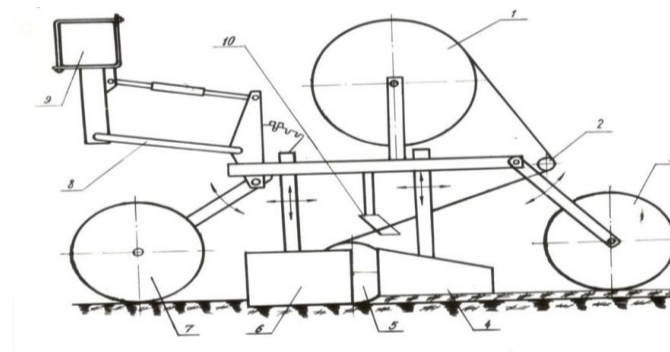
Structural and technological scheme of the film-laying unit section; 1 – film roll; 2 – guide; 3 – pressing device; 4 – covering discs; 5 – press roller; 6 – soil deflector; 7 – support wheel; 8 – section suspension; 9 – frame; 10 – blades.
